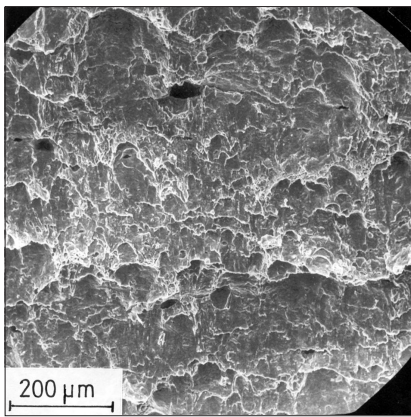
Fracture surface at greater distance of the notch tip
